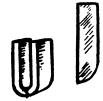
TWO PARTS USED IN MAKING THE HINGE
